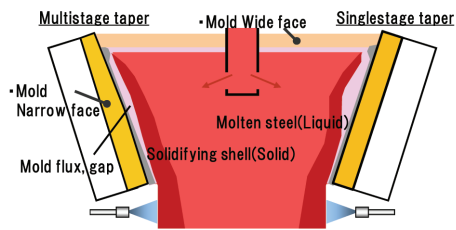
Shape of mold narrow face and distortion of solidifying shell
